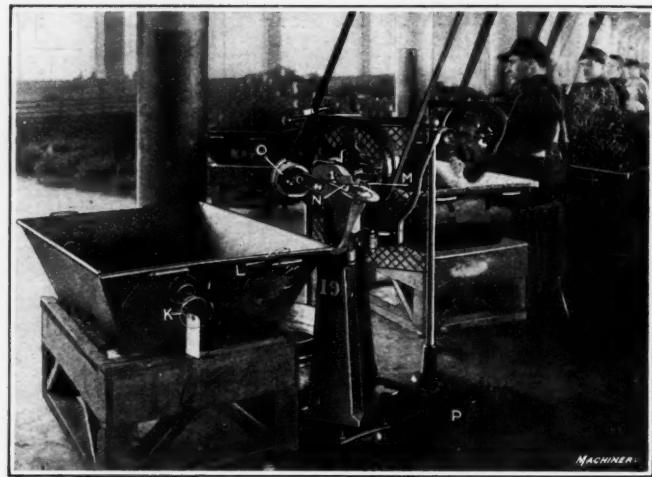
Knotting Machine that secures Ends of Wire to Spring Coils
